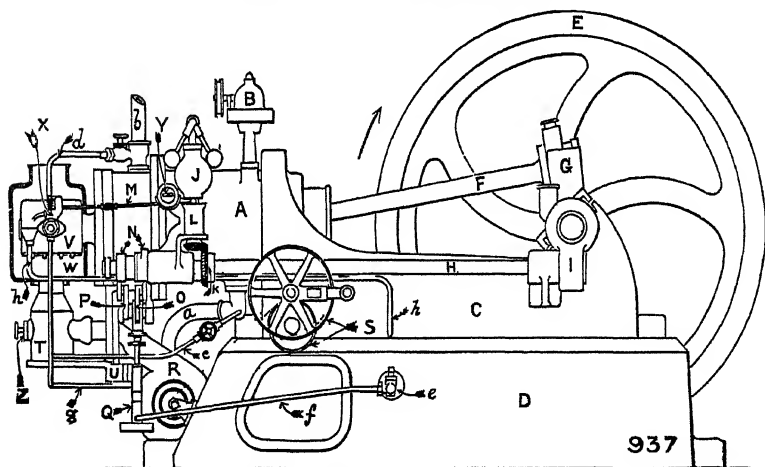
The Hornsby-Aldrich Oil-Engine, outline view.
